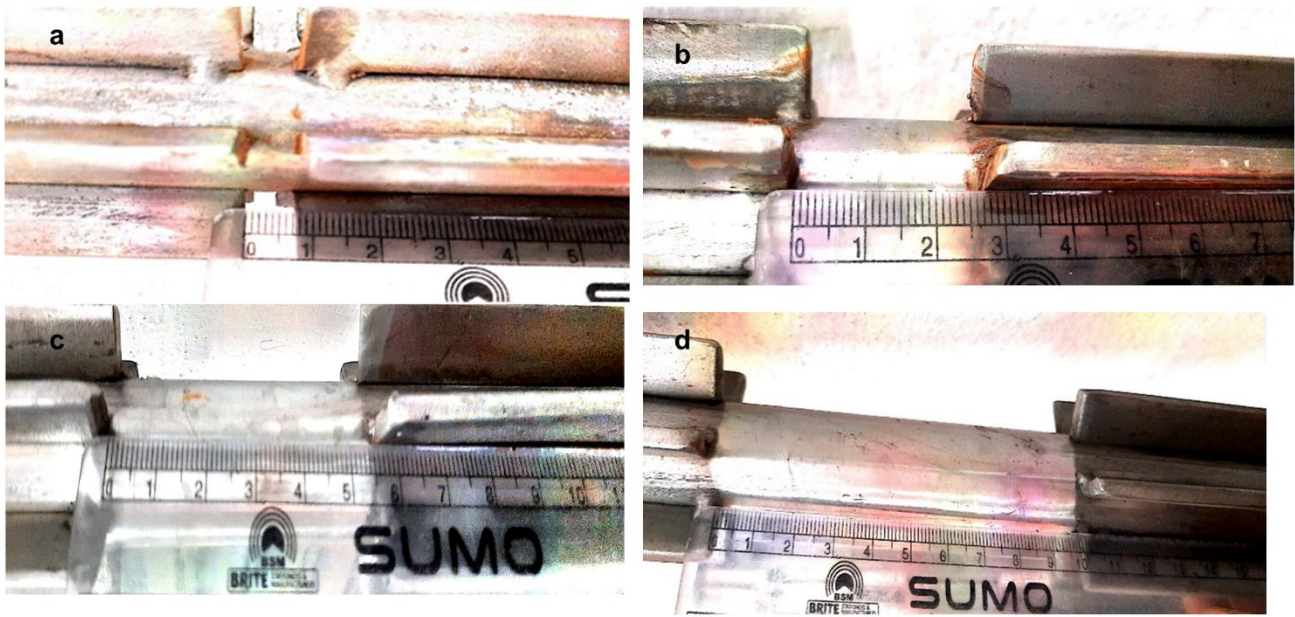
Design of finned tube with a) 7mm, b) 27, c) 55, d) 100mm interrupted
